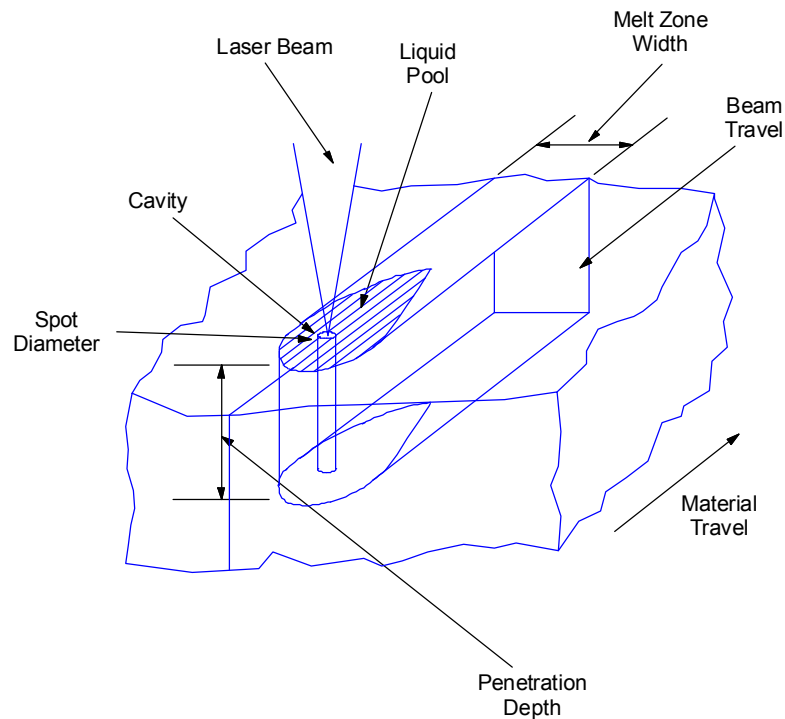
The laser beam butt seam welding process
